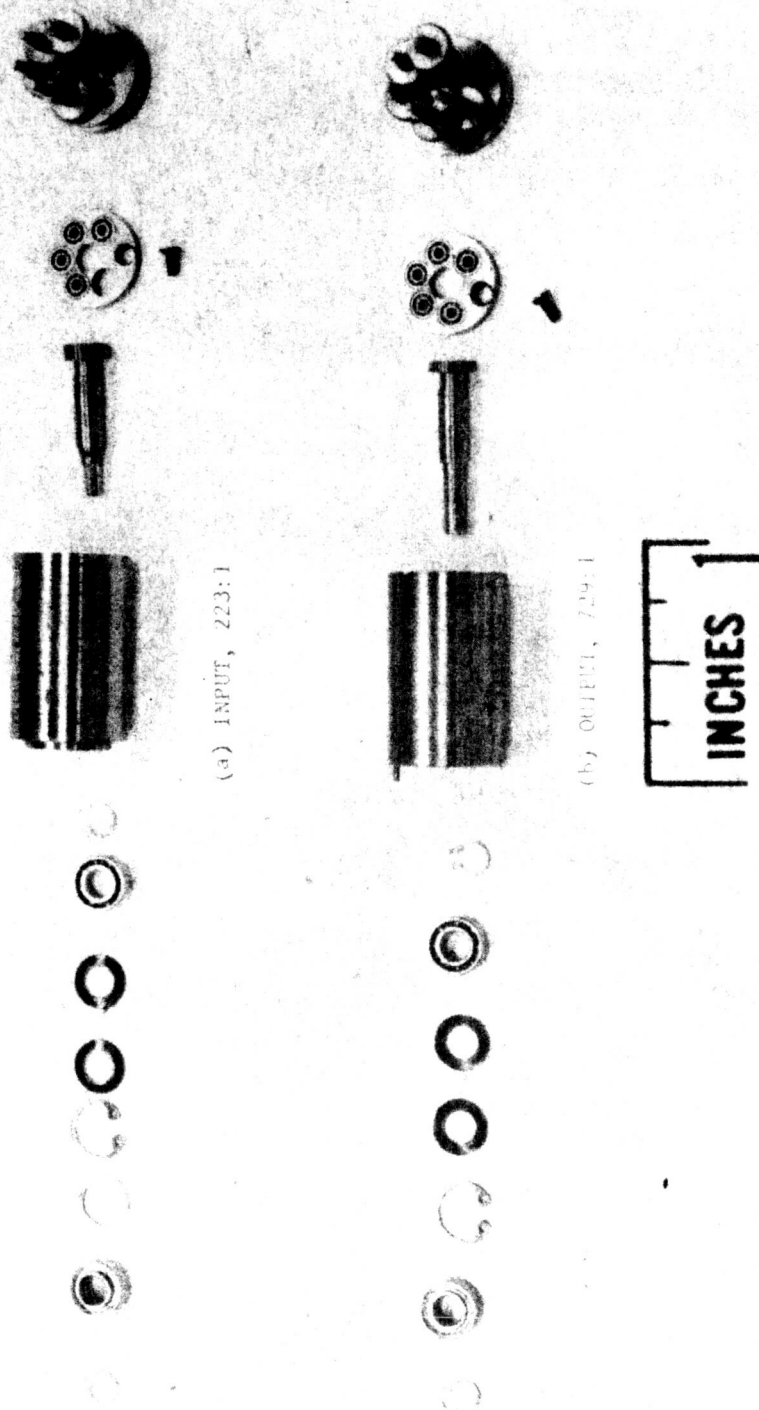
SIZE 5 GEAR BOXES USED IN AZIMUTH DRIVE ASSEMBLY
